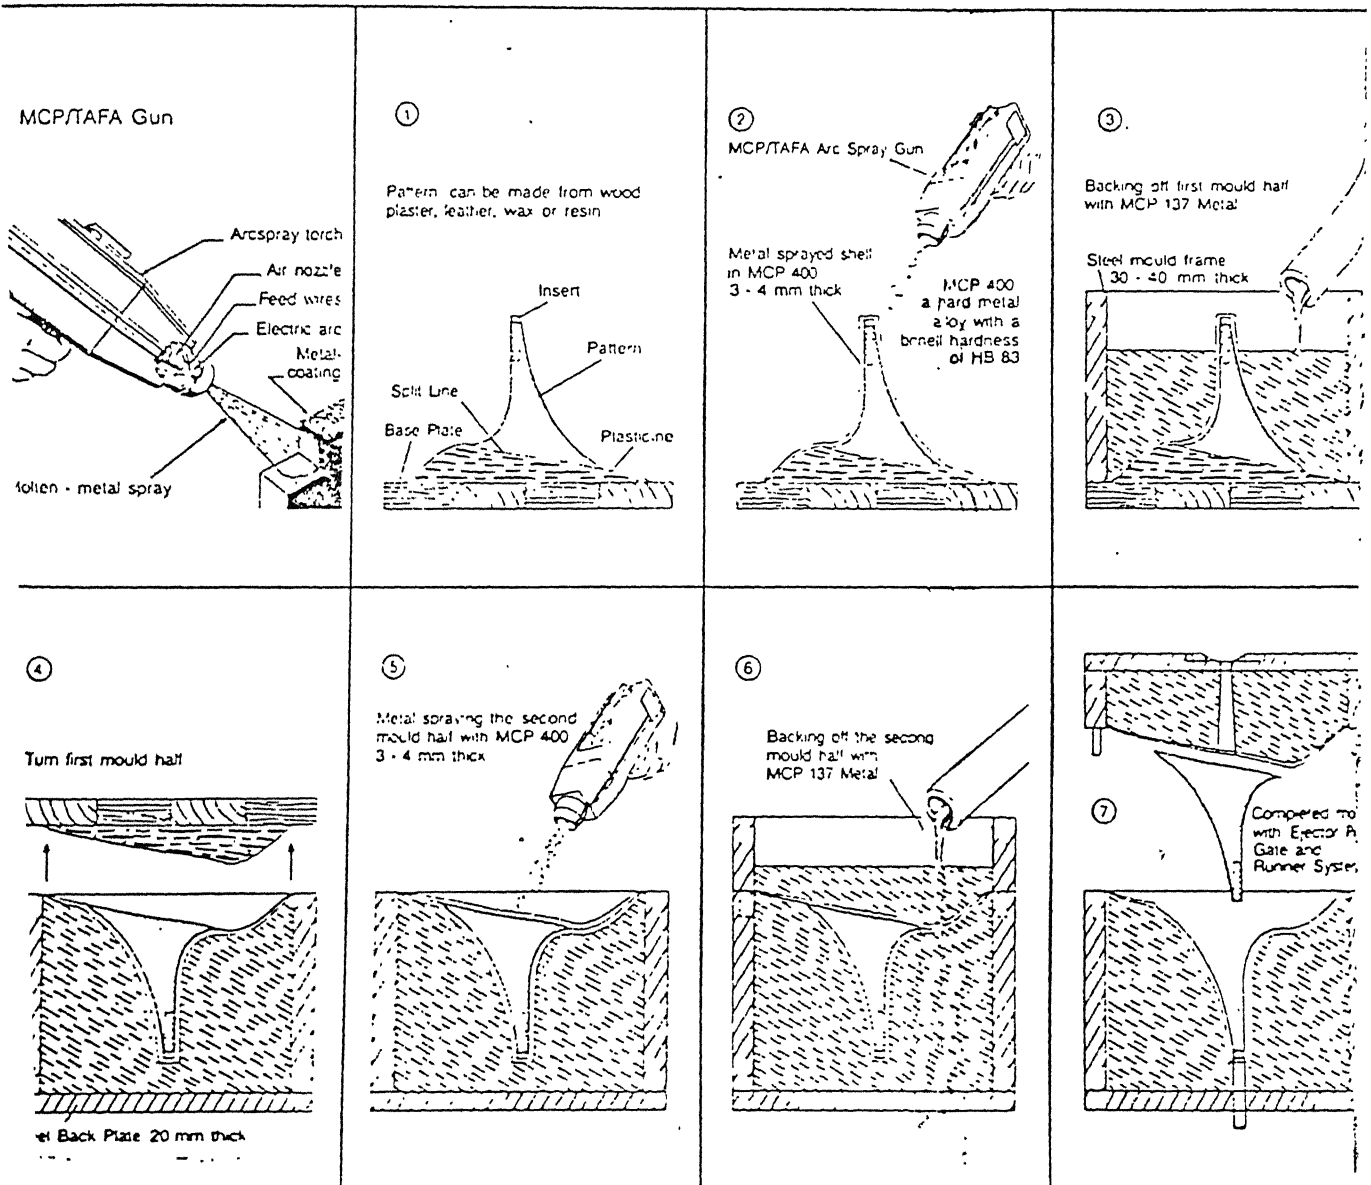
Process for making a mold with the MCP/TAFa for injection molding
